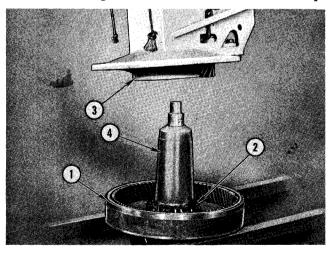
REMOVING KINGPIN HOUSING Ring Gear 1
